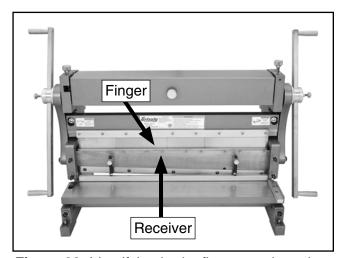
Identifying brake fingers and receiver on machine (G4011Z shown).
